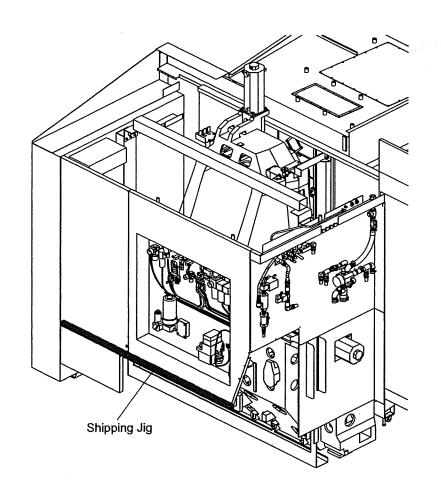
Y-Axis Shipping Jig Removal and Y-Axis Motor Installation
